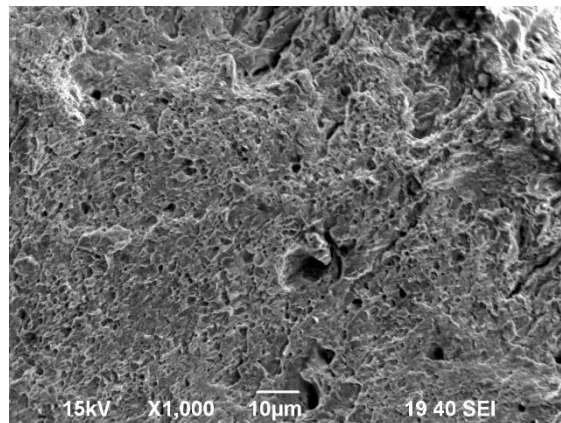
Fracture surface for one of the samples tested in H-gas blend.
